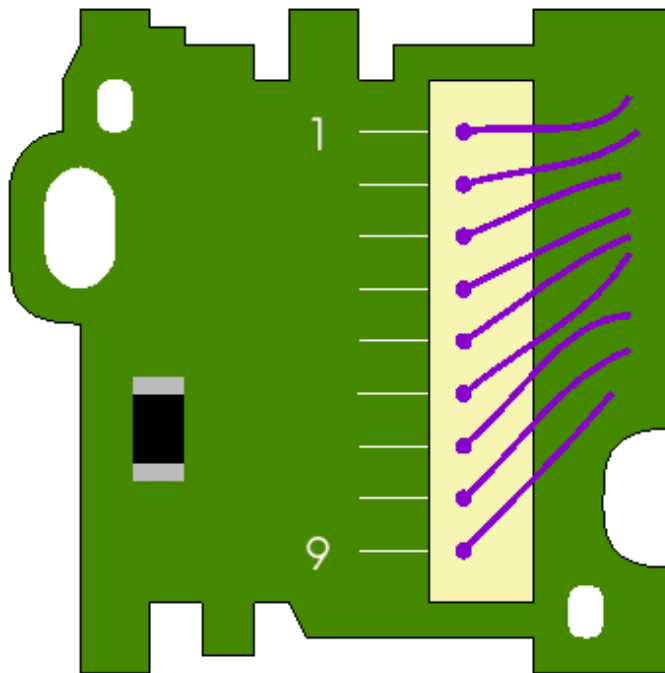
Layout of Image Sensor Circuit Board - Back (wire numbers shown)
